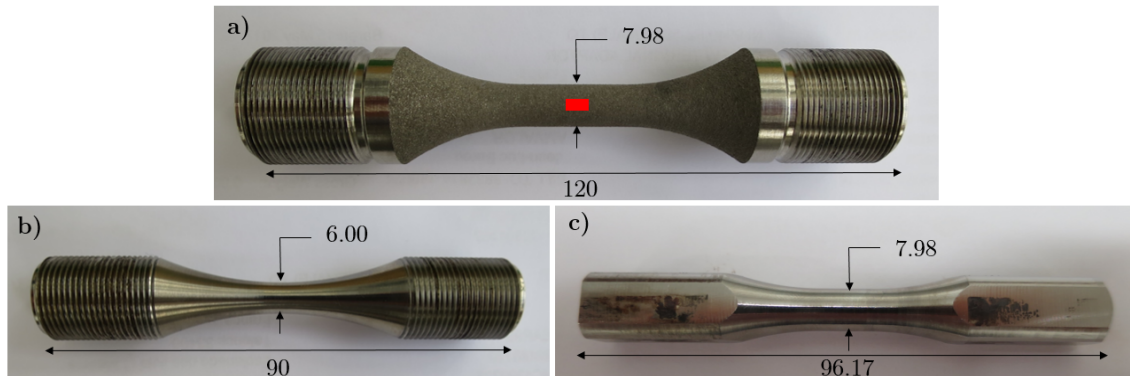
Dimensions of the samples used for Fatigue tests. a) SLM machined and as-built used for fully reverse uniaxial tension/compression tests. The red rectangle shows the location of the surface scans; b) HR used for fully reverse uniaxial tension/compression tests; c) SLM machined specimens used for fully reverse torsion tests.
